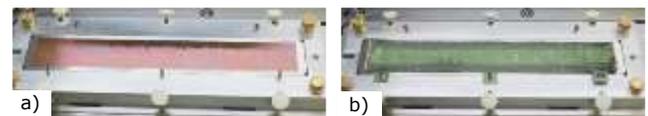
a) Assembly chuck with 14 chips. b) FPC mounted, prepared for joining of FPC to chips.
